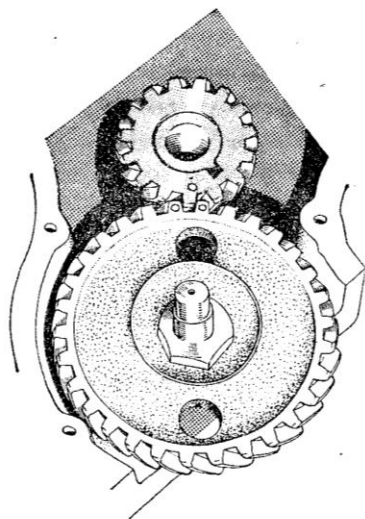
The punch-mark on the camshaft wheel should be between the two marks on the crankshaft wheel.
